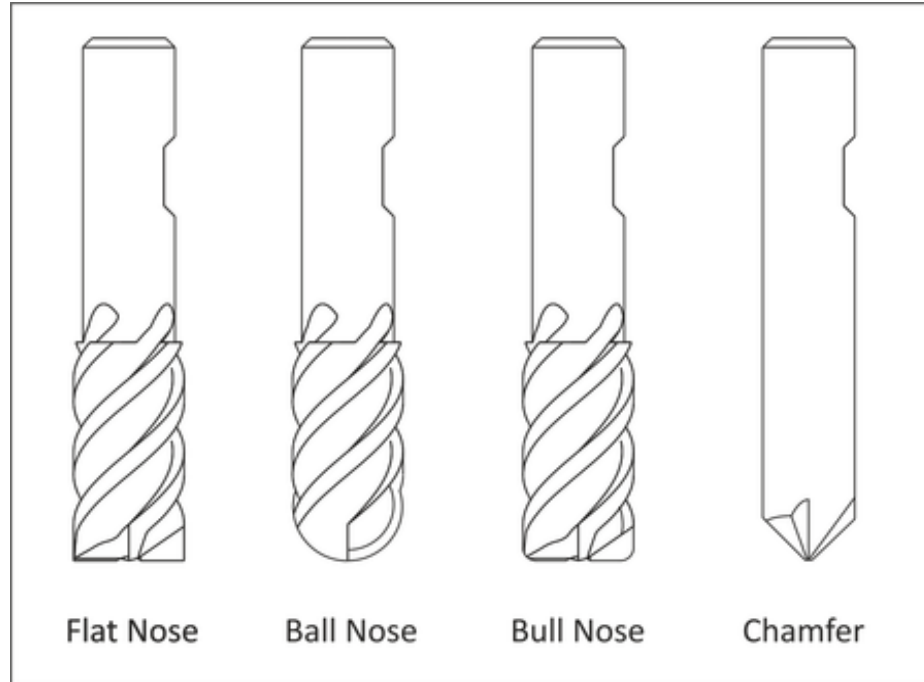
Types of End Mills Used in Milling (HSMWorks)
